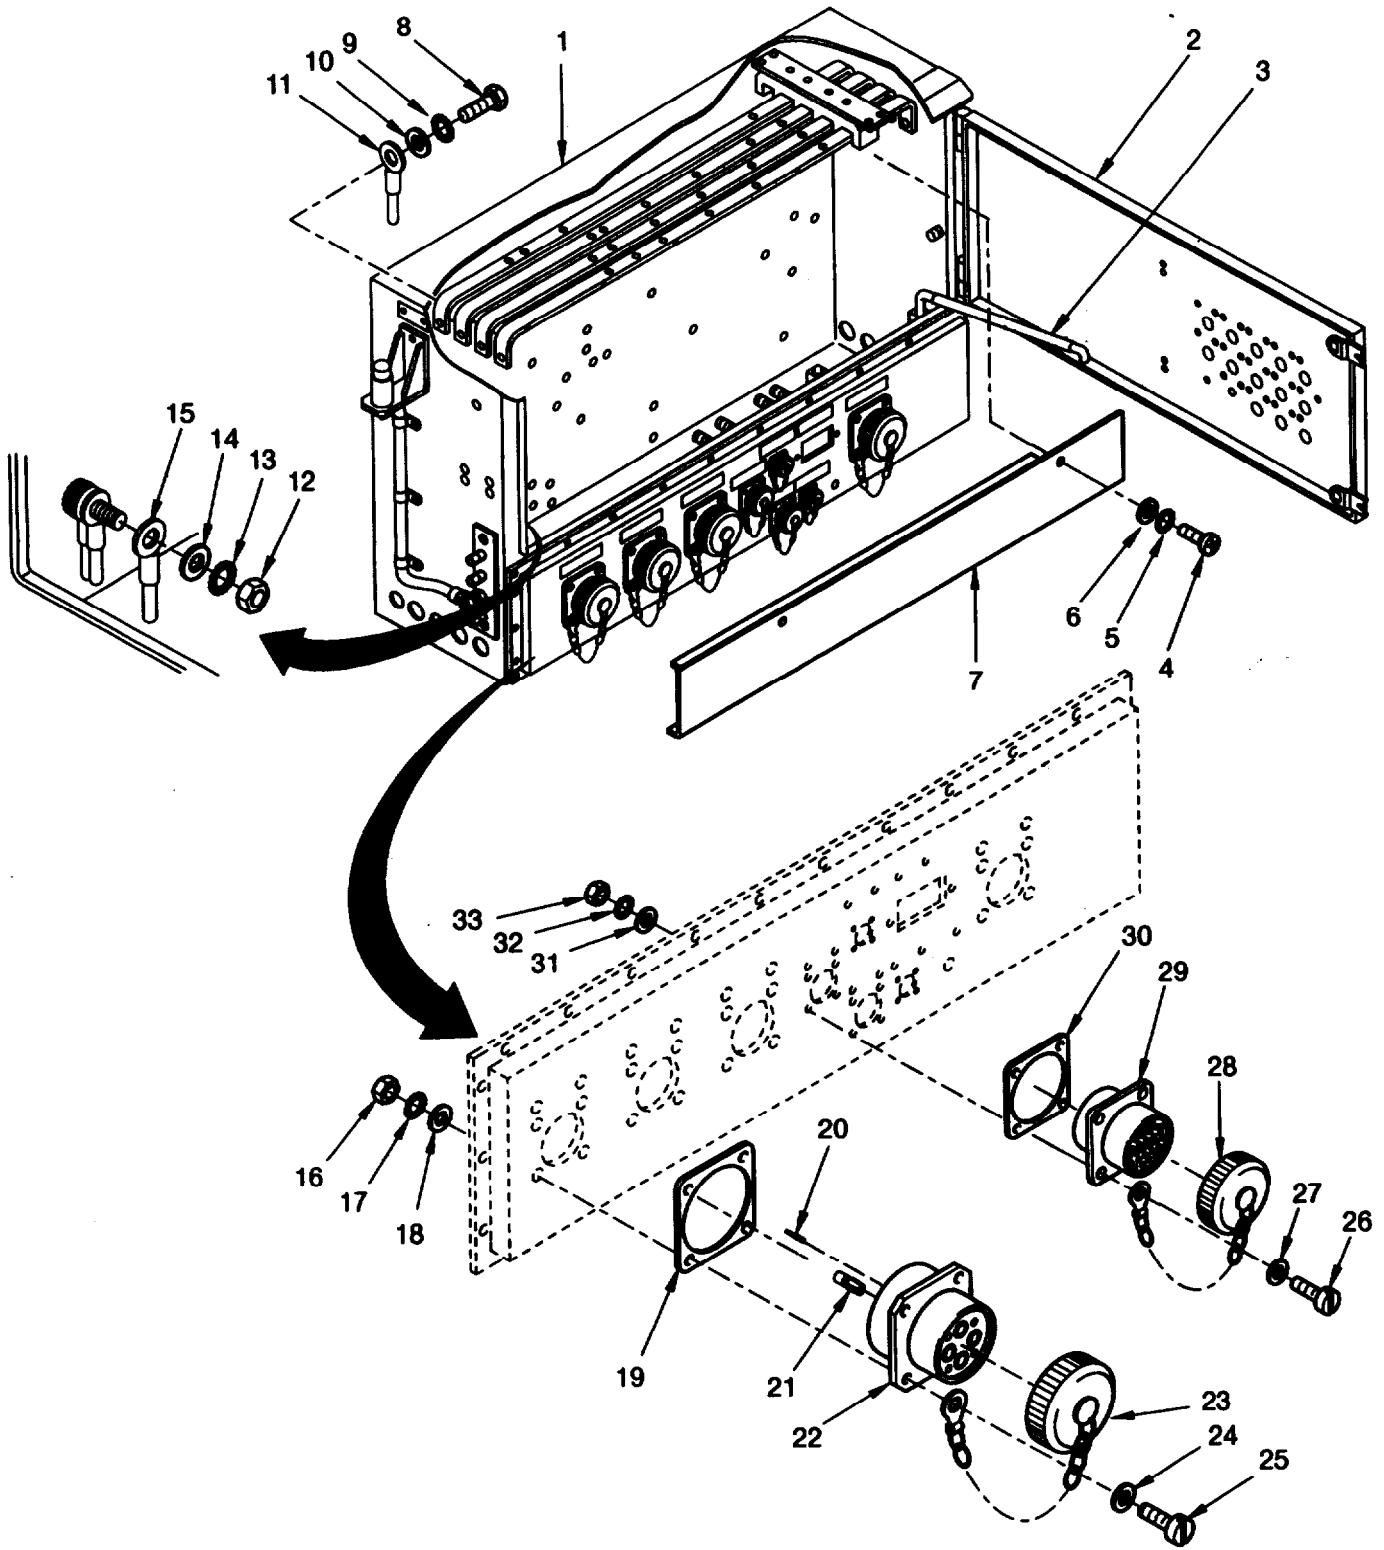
Connection Panel, Receptacles J1 to J5 (sheet 1 of 2).
